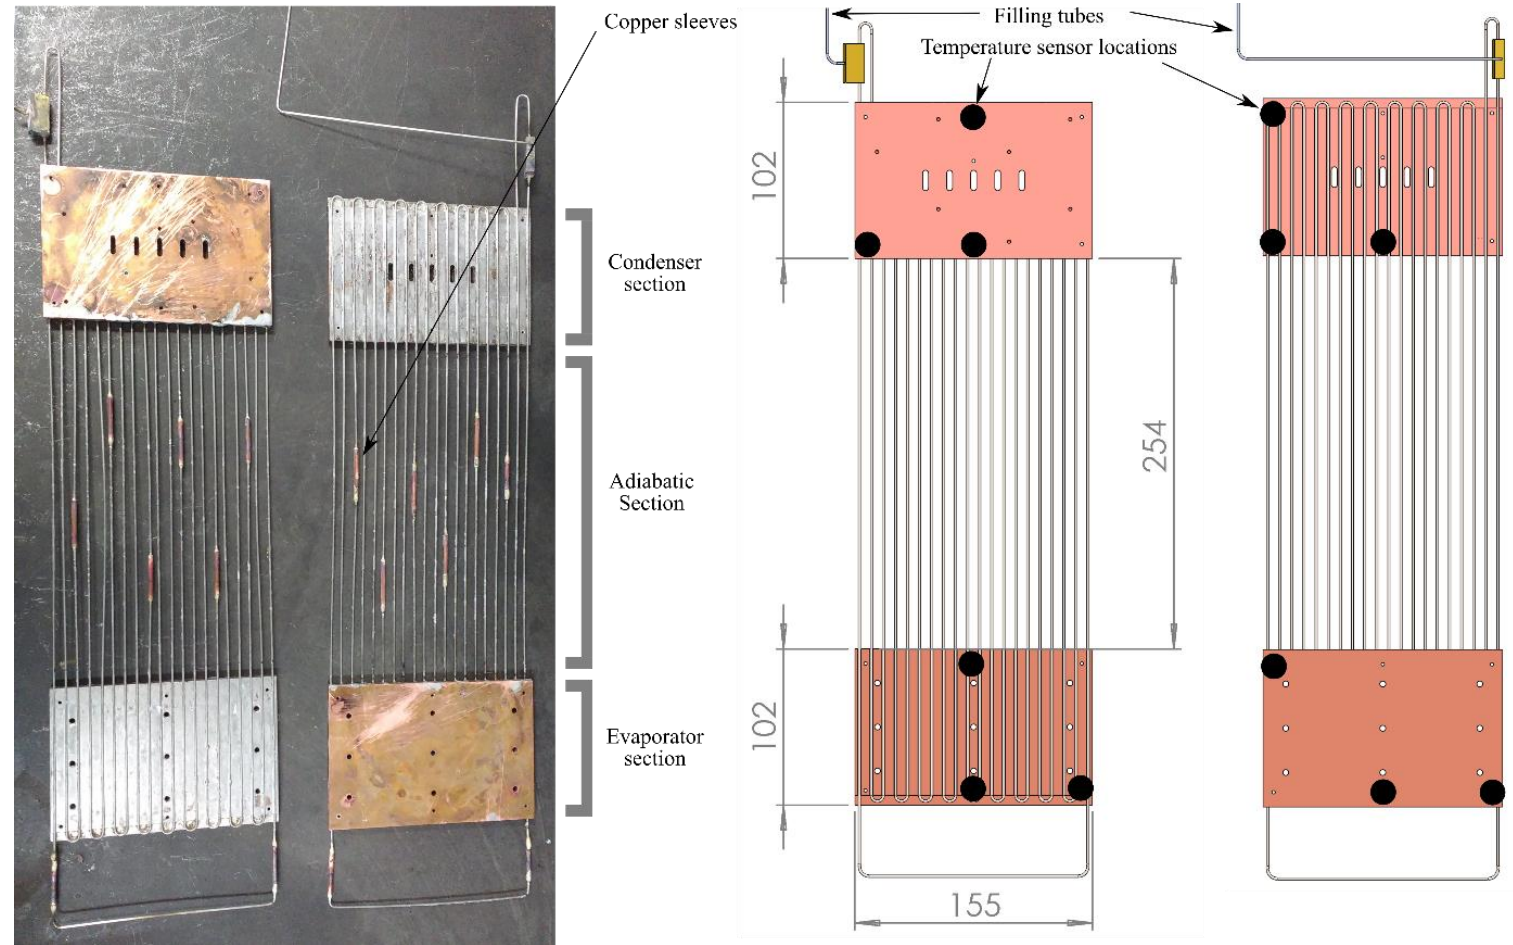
Image (left) and CAD assembly (right) of PHPs designed and fabricated for this work. Dimensions are in mm. See paper for details.
